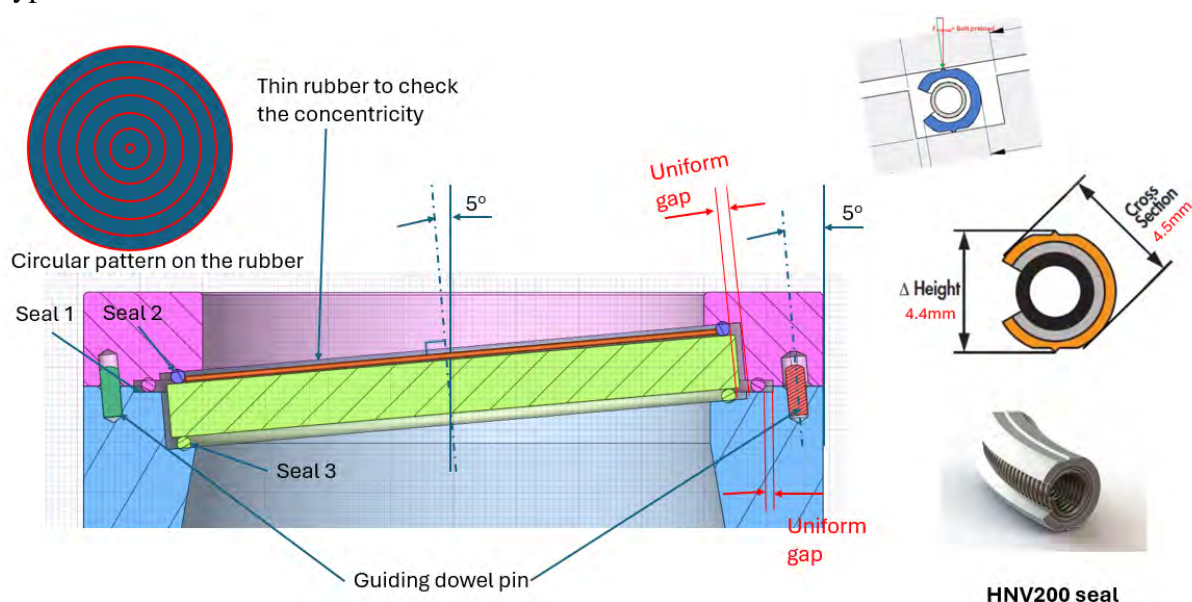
Cross-section of the window showing the dowel pins to guide the extension tube, the delta-shaped seal (HNV200), and a tool to check the concentricity of the disk after assembly.
